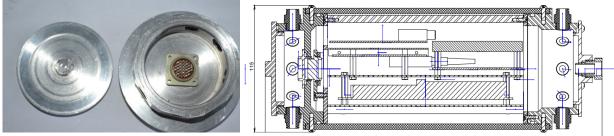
Drawing housing of electronics unit and real assembly of end cap
